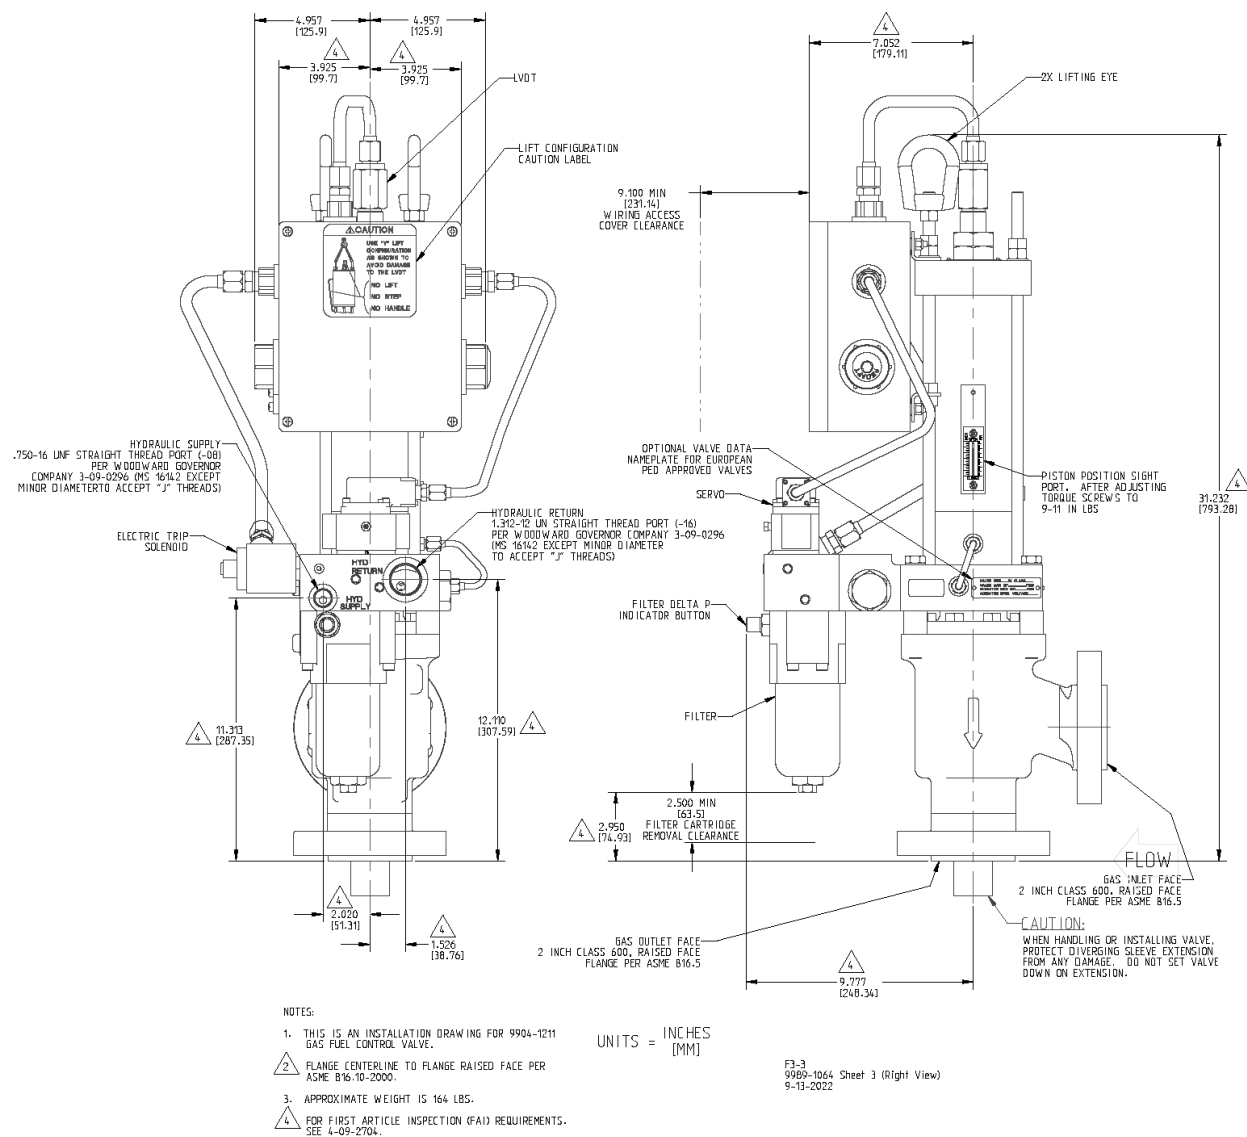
Outline Drawing 2" High Recovery Control Valve (Right View)
